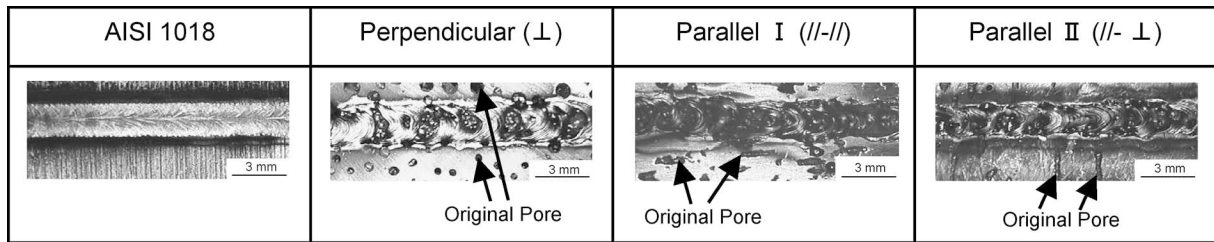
Appearance of laser weld beads on the nonporous iron (AISI 1018) and lotus-type porous iron; pore directions perpendicular ( $\perp$ ), parallel I ( $//-//$ ), and parallel II ( $//-\perp$ ) to the specimen surface at a laser power of 1.0 kW and welding speed of 1 m/min.
